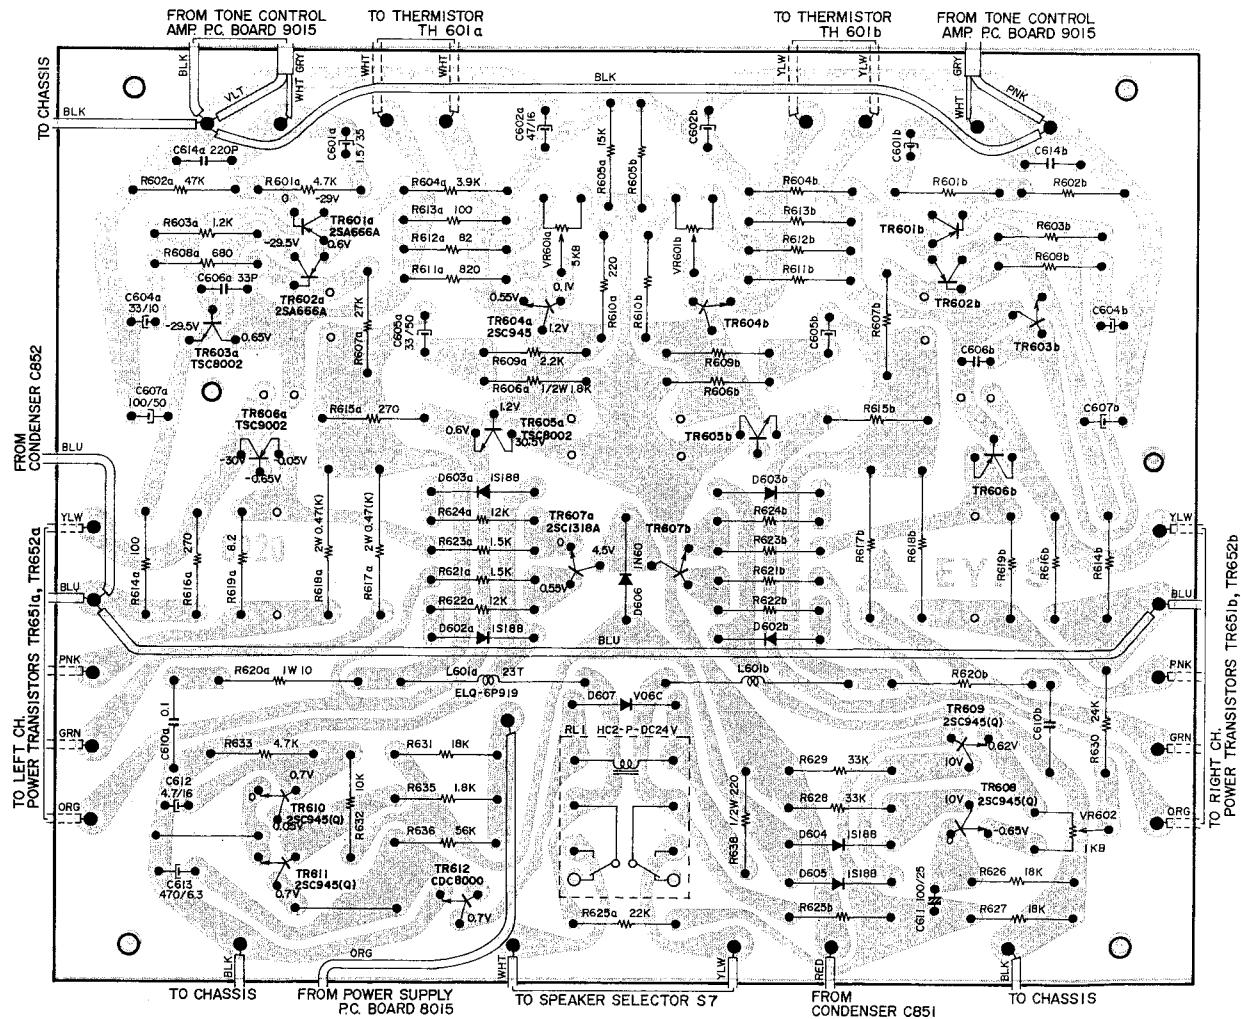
POWER AMP. P.C. BOARD 6020 (Face Side)
